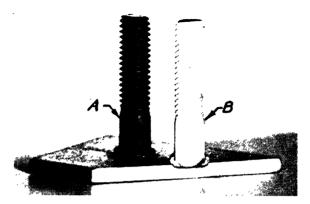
A stud welded to a stud plate: A. shows the complete stud weld, B. shows the stud cross-sectioned to indicate the excellent fusion
